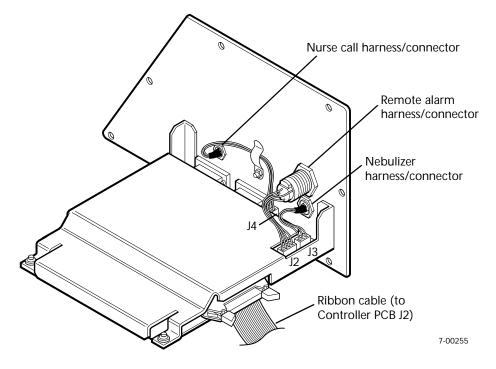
Removing harnesses/connectors from Communications option assembly
